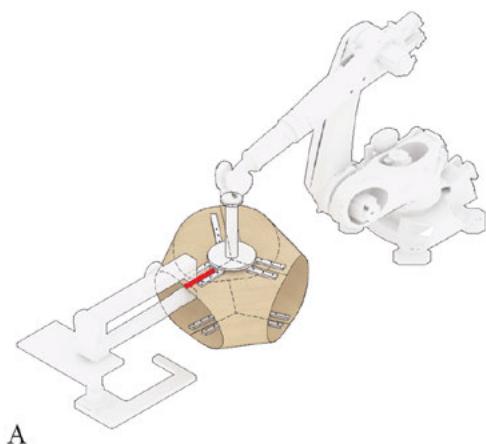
Diagram of the robotic fabrication process. Equipped with an adaptable effector the robot holds a pre-assembled segment and guides it through the sewing machine.
